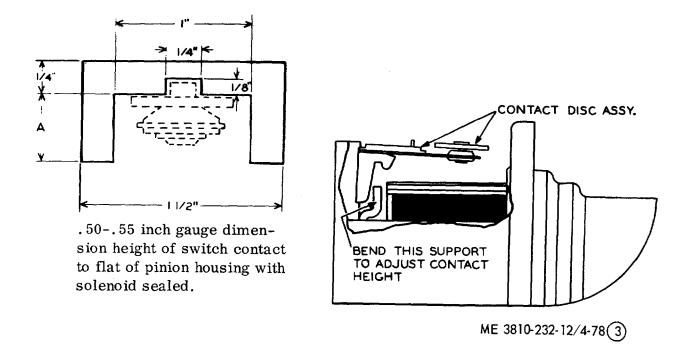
Crane engine s tarter and solenoid, removal and installation, Sheet 3 of 3.
